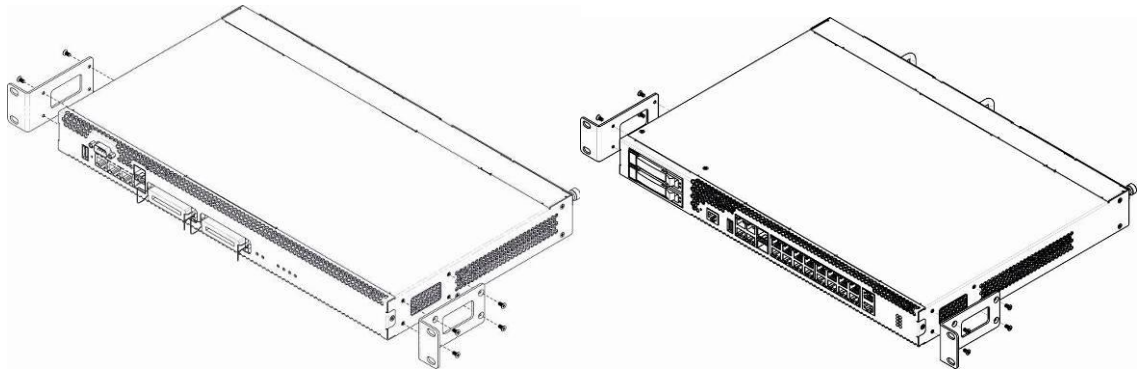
Support brackets mounting for SMG-1016M (left-hand side) and SMG-2016 (right-hand side)
